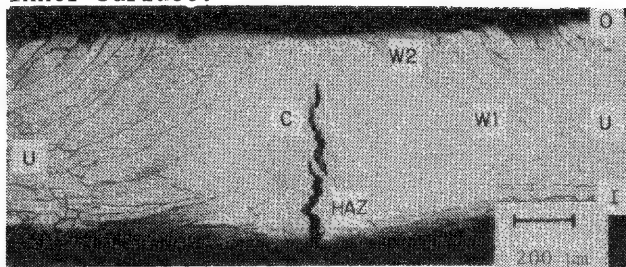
Section across quench shows crack. forming mechanisms that weaken grain boundaries as possible causes of cracking. Gas porosity and high-temperature creep are two such mechanisms.
